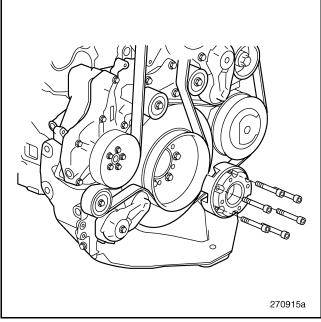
Front Engine Power Take-Off (FEPTO) Assembly
